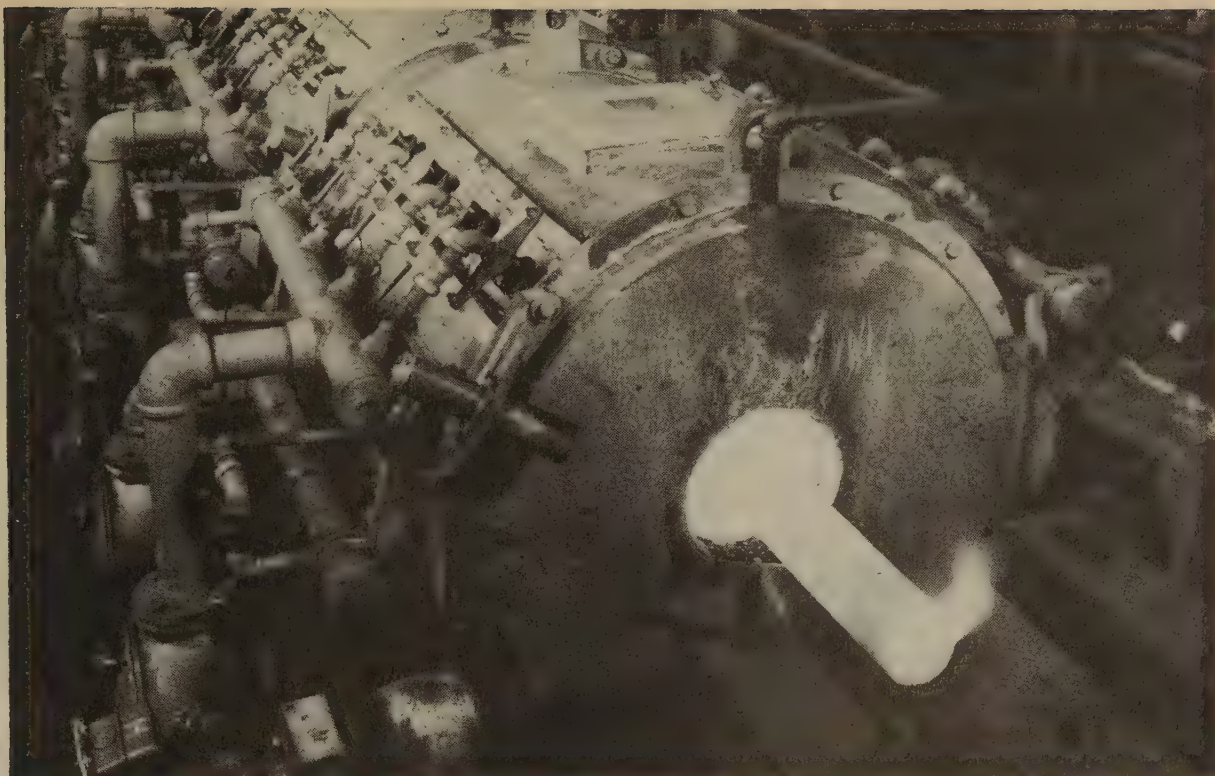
Heated pierced seamless tube emerging from the line of furnaces. Note radiation type pyrometer supported at upper left of furnace end and sighted on the hot tube.
